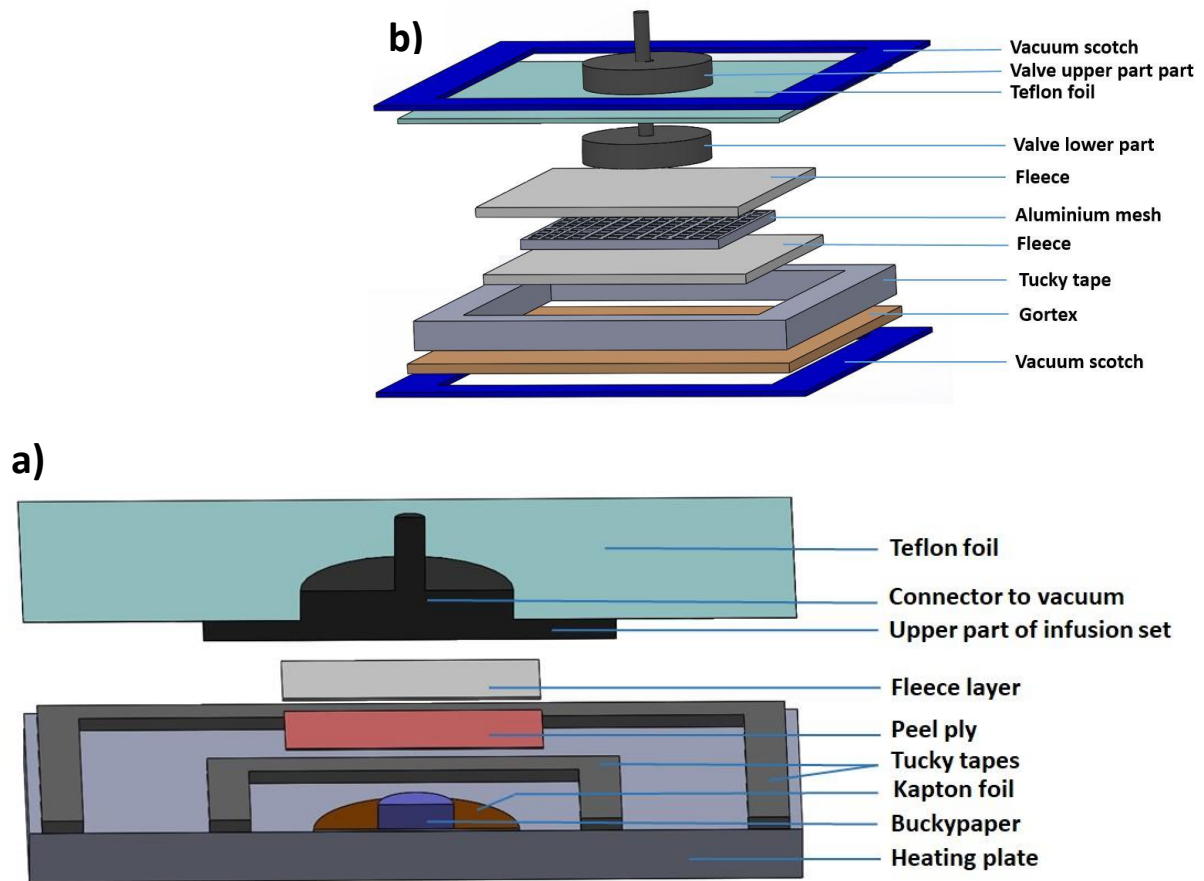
Resin removal set up: a – general view; b – the detailed upper part structure
